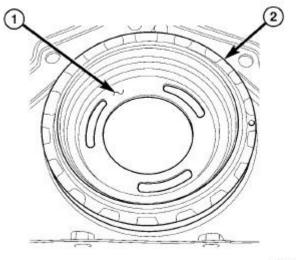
Removing/Installing Crankshaft Rear Oil Seal Courtesy of CHRYSLER LLC
